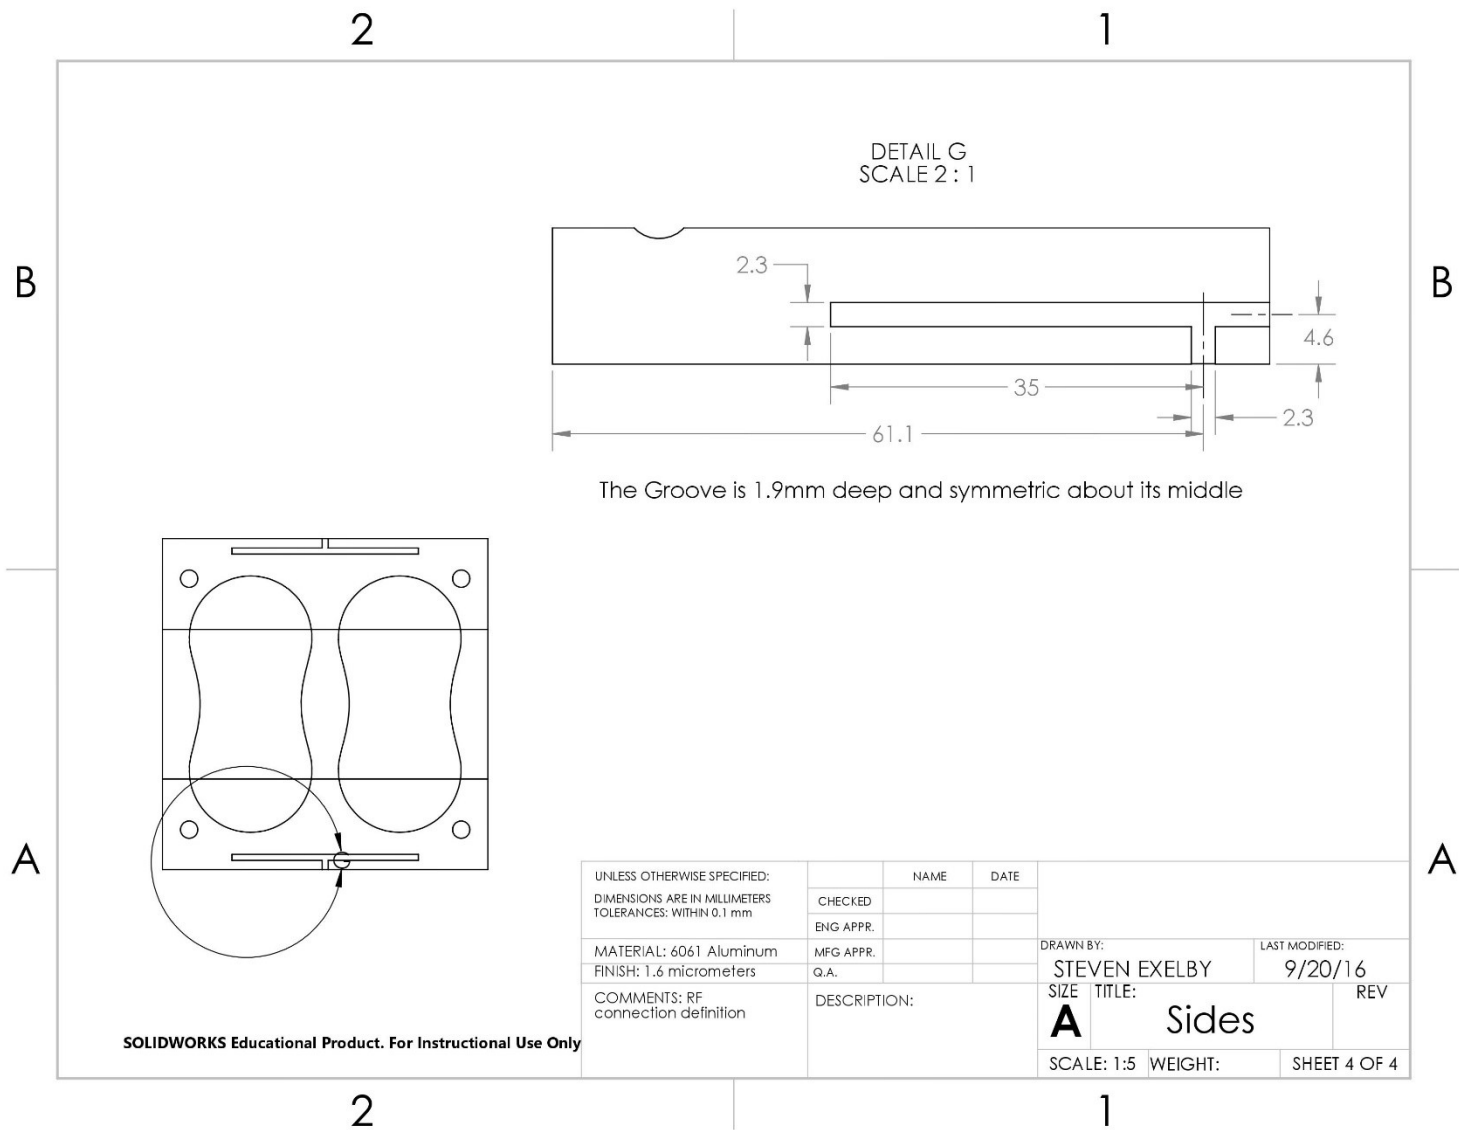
Cylindrical side pieces of the RPCFA inner housing, page 4.
